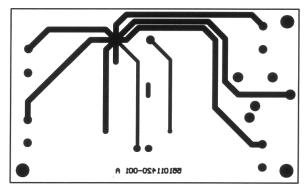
Recommended PC Board Layout Bottom-Side Layout
